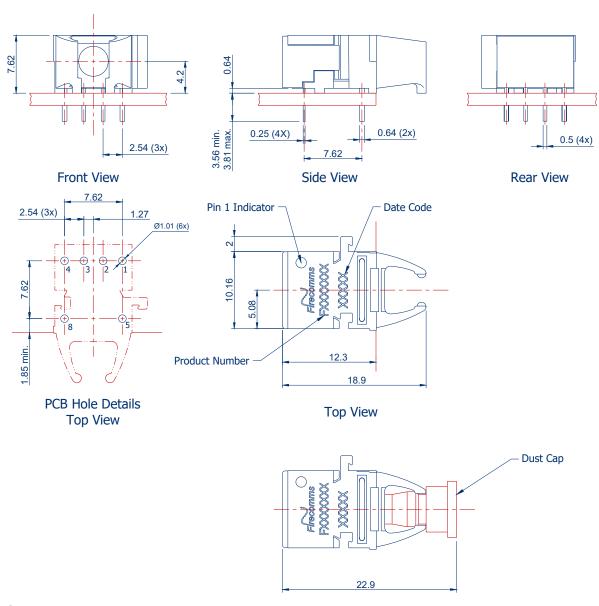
Mechanical dimensions of the horizontal receivers and PCB footprint, which is a top view General dimensional tolerance is  $\pm\,0.2$  mm
